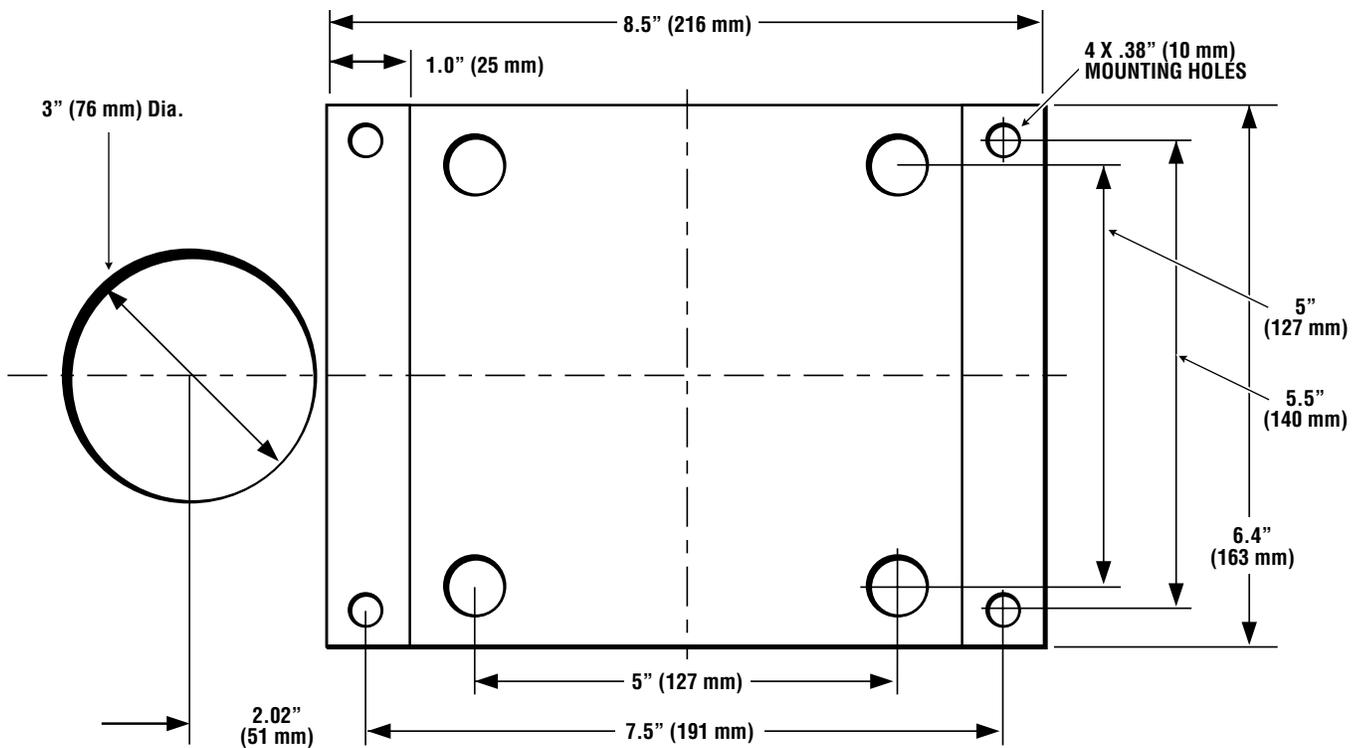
X45 Plus Mounting Plate Dimensions & Exhaust Hole
